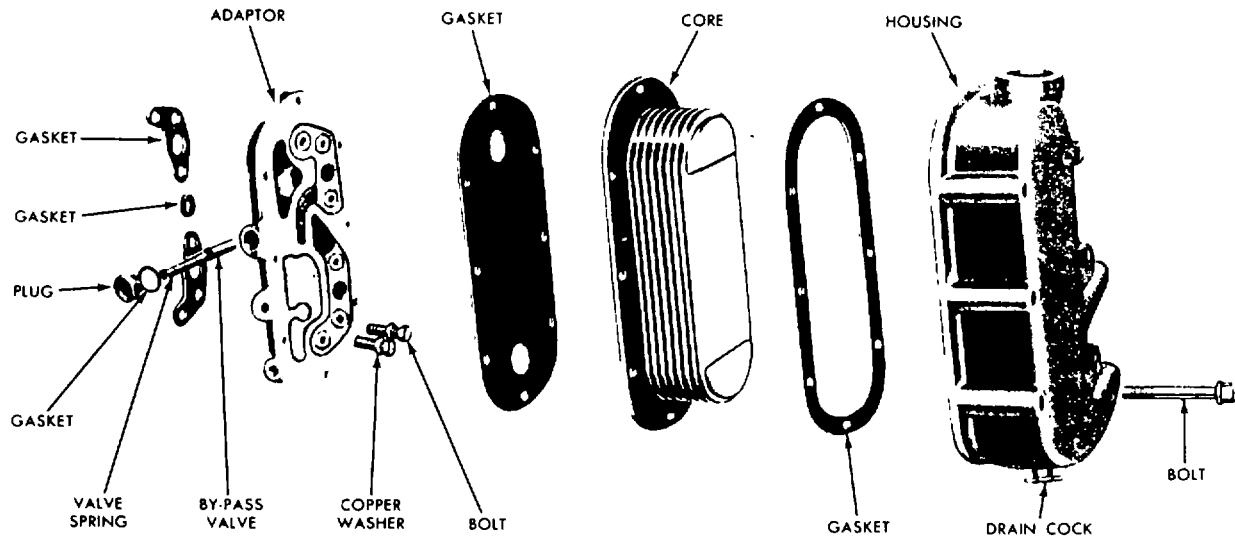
Oil Cooler Disassembly and Reassembly.
